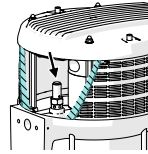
Installation location of the safety valve for type 230027, 270049 and 333037
